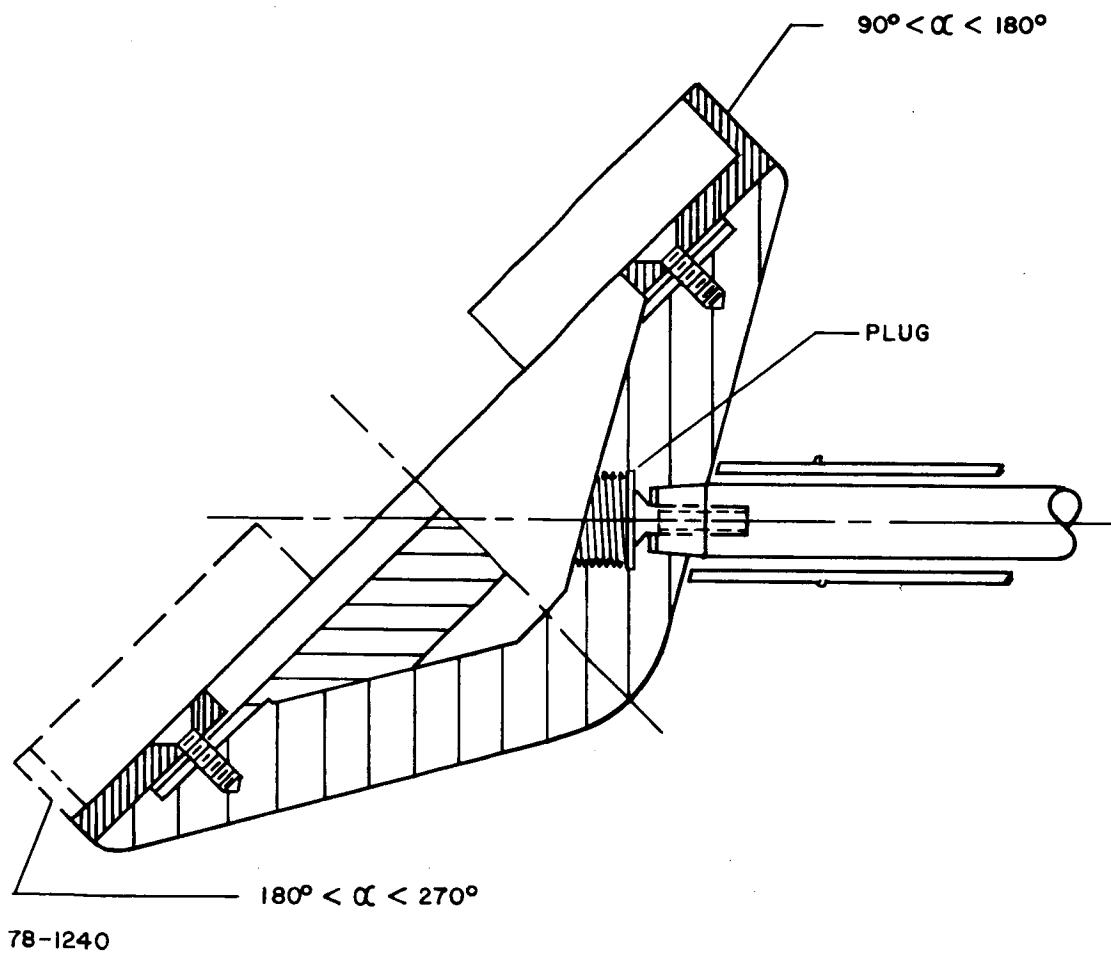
TEST MODEL -- STING ARRANGEMENT (B)
